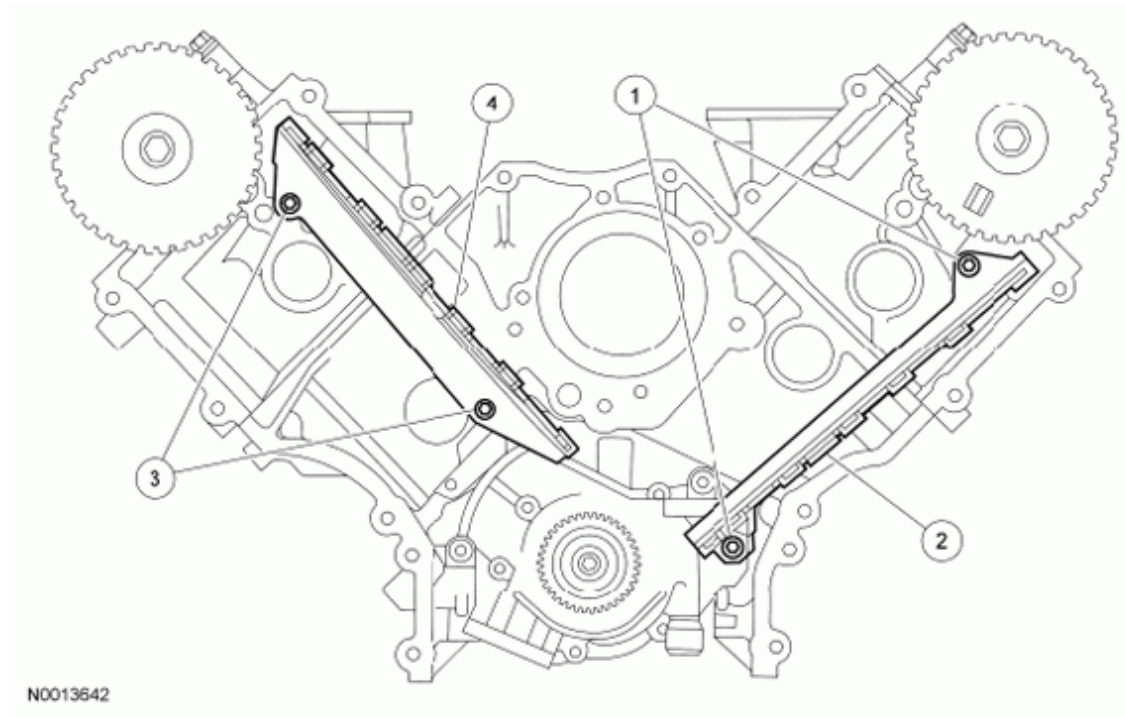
Identifying Timing Chain Guide And Mounting Bolts
